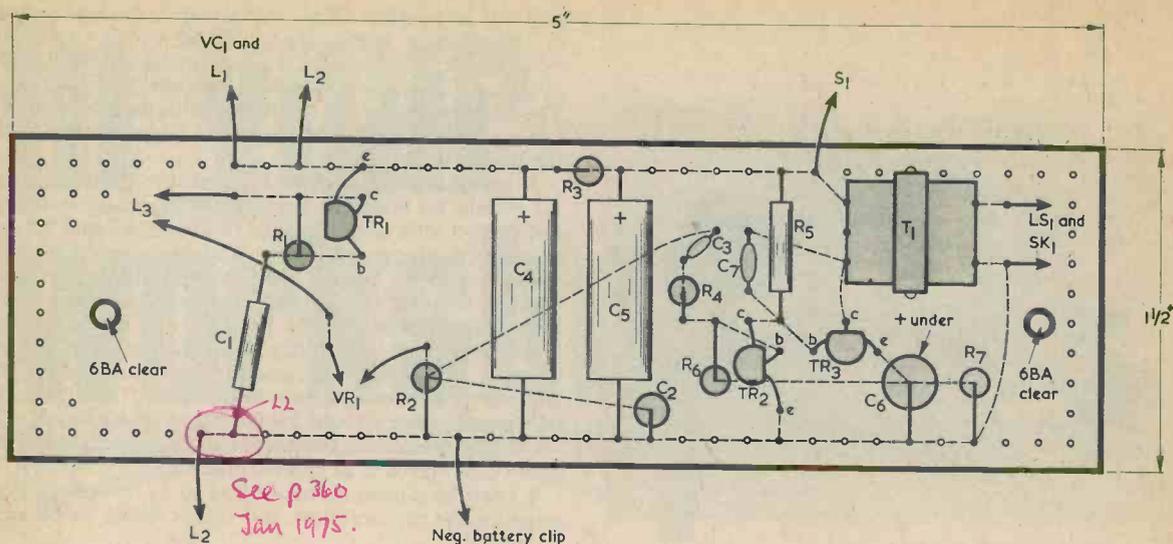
The smaller components are assembled on a plain Veroboard panel, shown here as viewed from the component side
